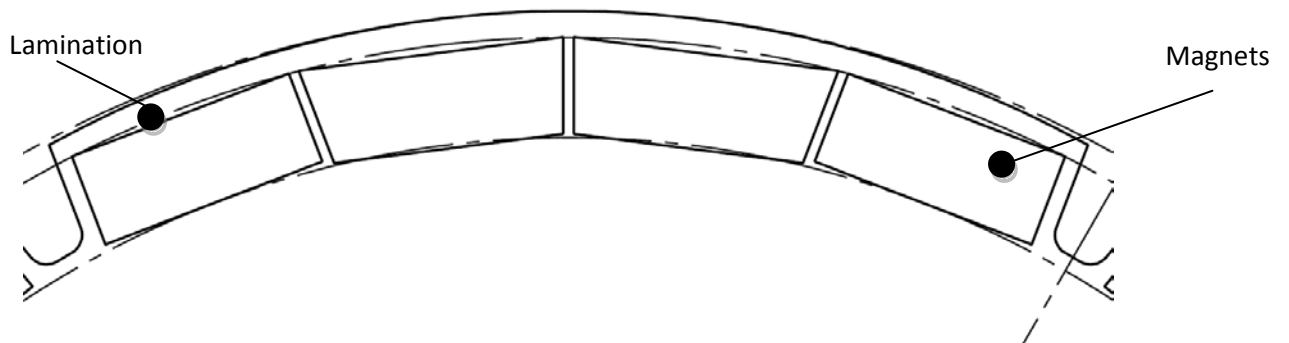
Buried magnets in side rotor. After assembly, the rotor is impregnated and all gaps are filled with resin. The magnet is protected from its surroundings.
